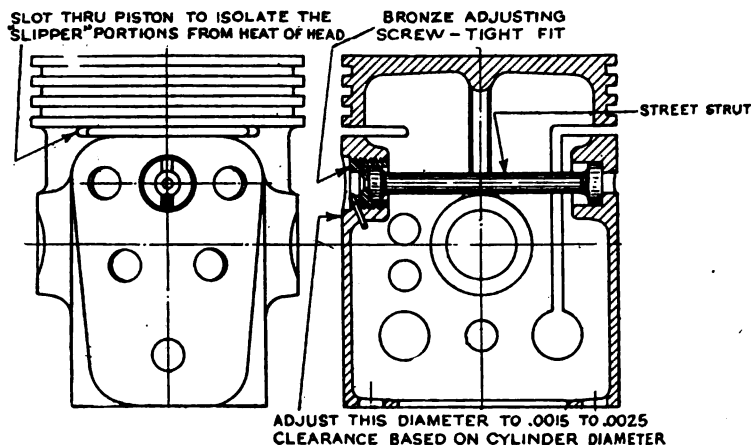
Constant clearance aluminum piston, showing means for adjusting initial clearance
